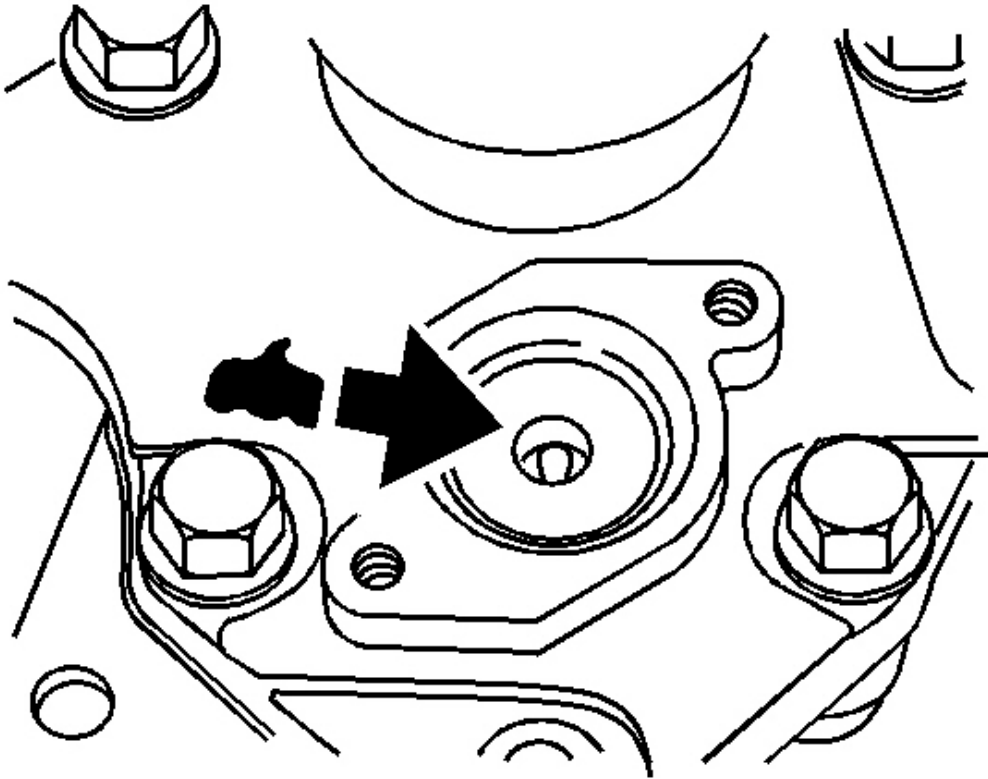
Packing Cavity Of Inner Intermediate Shaft Bearing Housing With Grease
